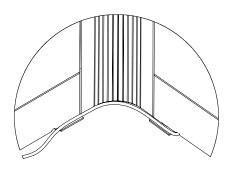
DETAIL A For cabling entering/exiting the wall, route the cable through the cut outs. 2 cut-outs per wall.
